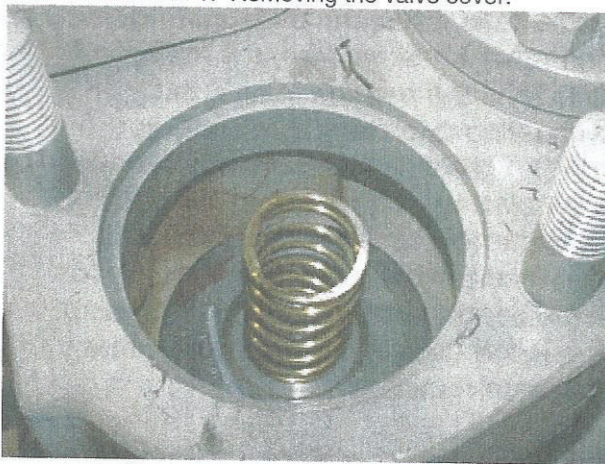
The valve cover has been removed showing the valve and valve spring.
